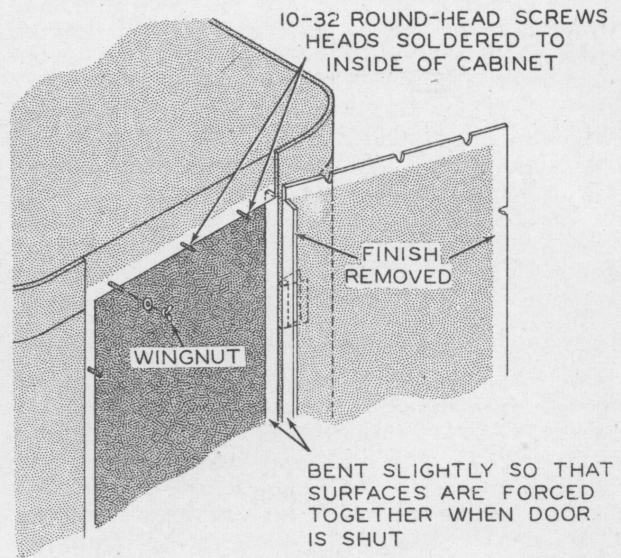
Scheme employed to insure metal-to-metal contact between the door and rear edges of the enclosed rack.
